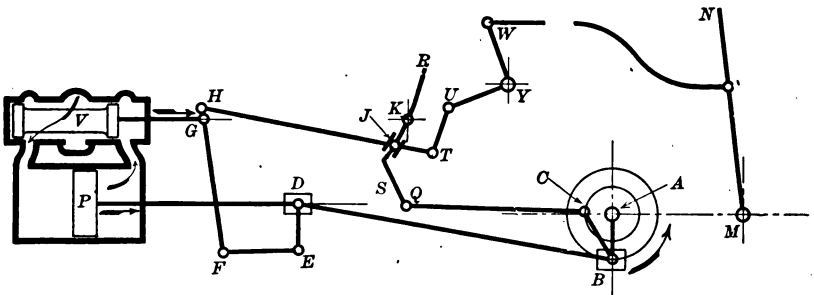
WALSCHAERT GEAR, INSIDE ADMISSION, SET FULL GEAR FORWARD
